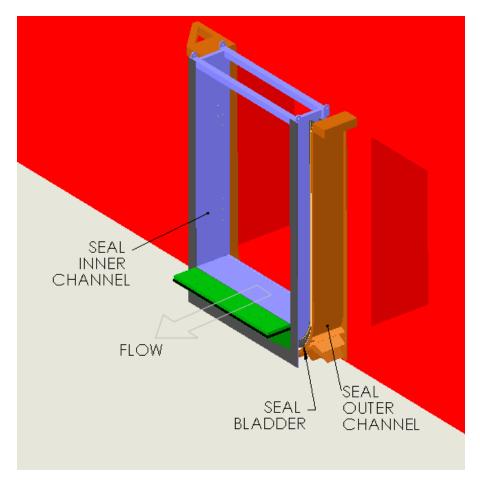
FSS to SWS Seal Mechanism Concept
